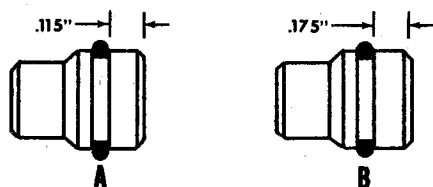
Note difference in "O" ring position on above plugs. Plug (B) is Ford part No. C9NN-3R675-A and should be installed to stop oil leakage described in paragraph 16.
